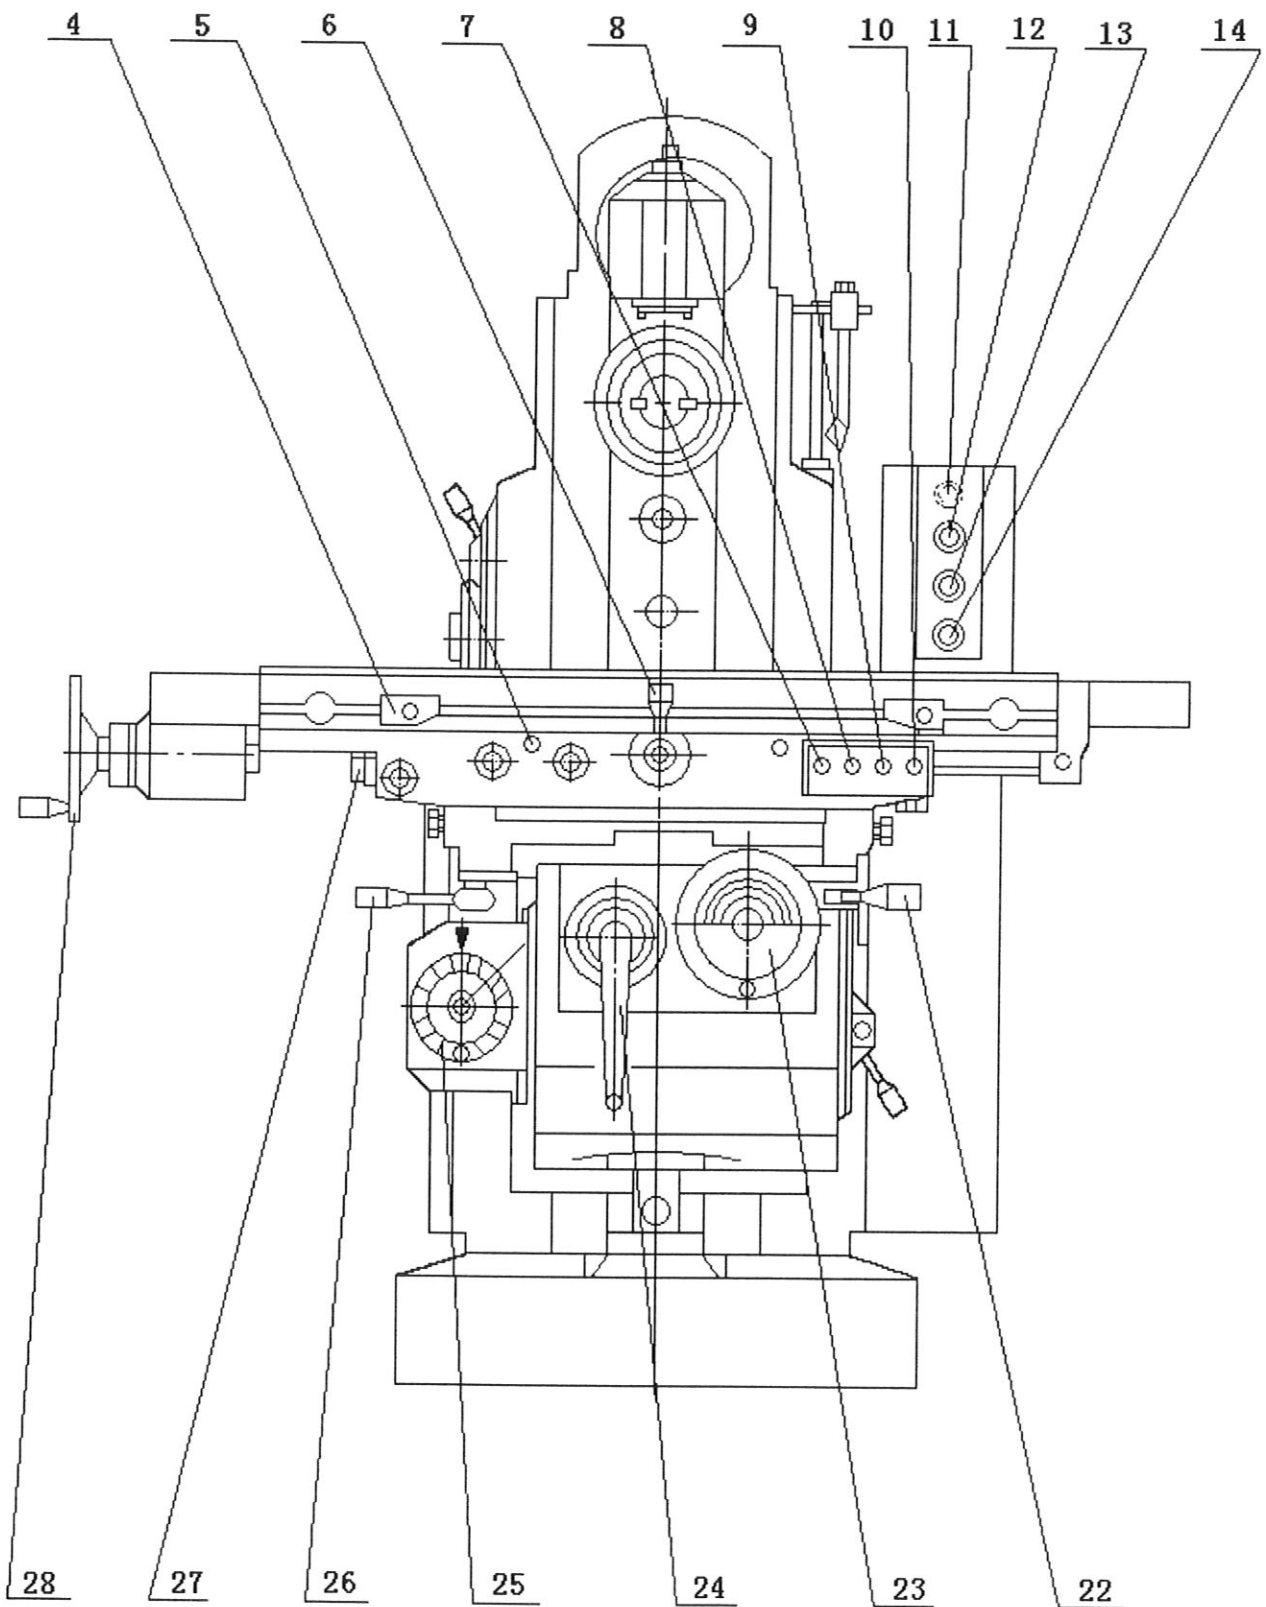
Main view of series X6230 Universal Rotary-Head Milling Machine
